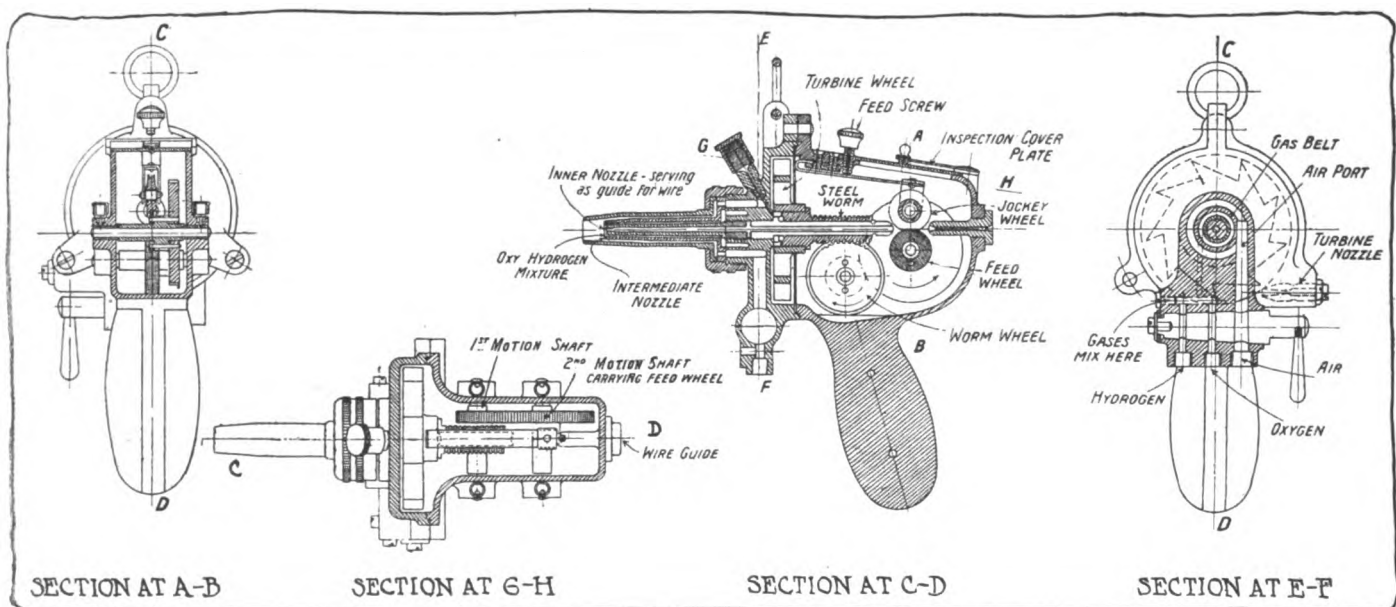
Mechanism of the Schoop-Morf metal spraying pistol in four sectional views
